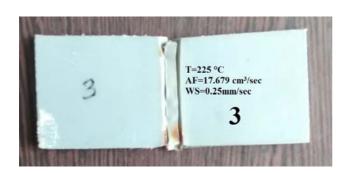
Weld bead obtained using different combination of input parameter
